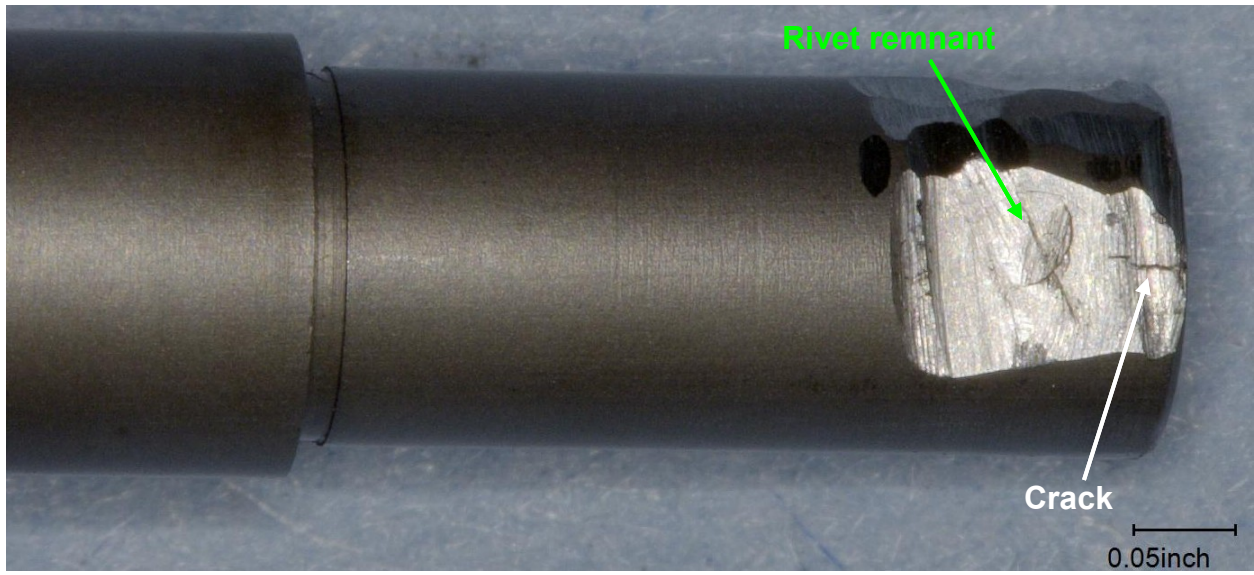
The output gearshaft, rotated 90° from Figure 4, showing one of the cracks and the rivet remnant in the gearshaft cavity.
